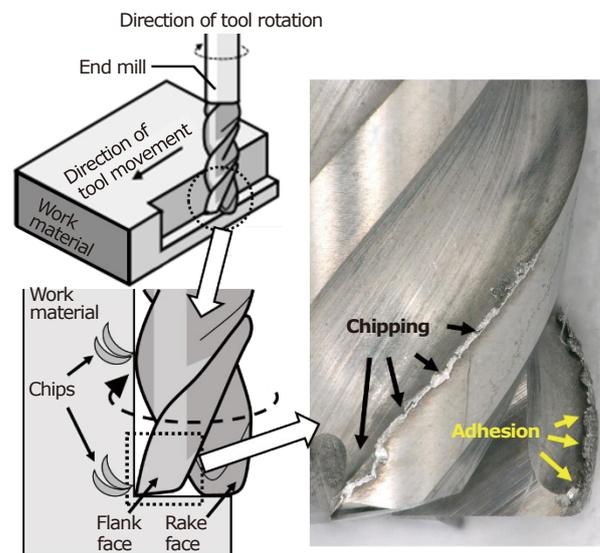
Example of tool damage in end milling of difficult-to-cut metals
